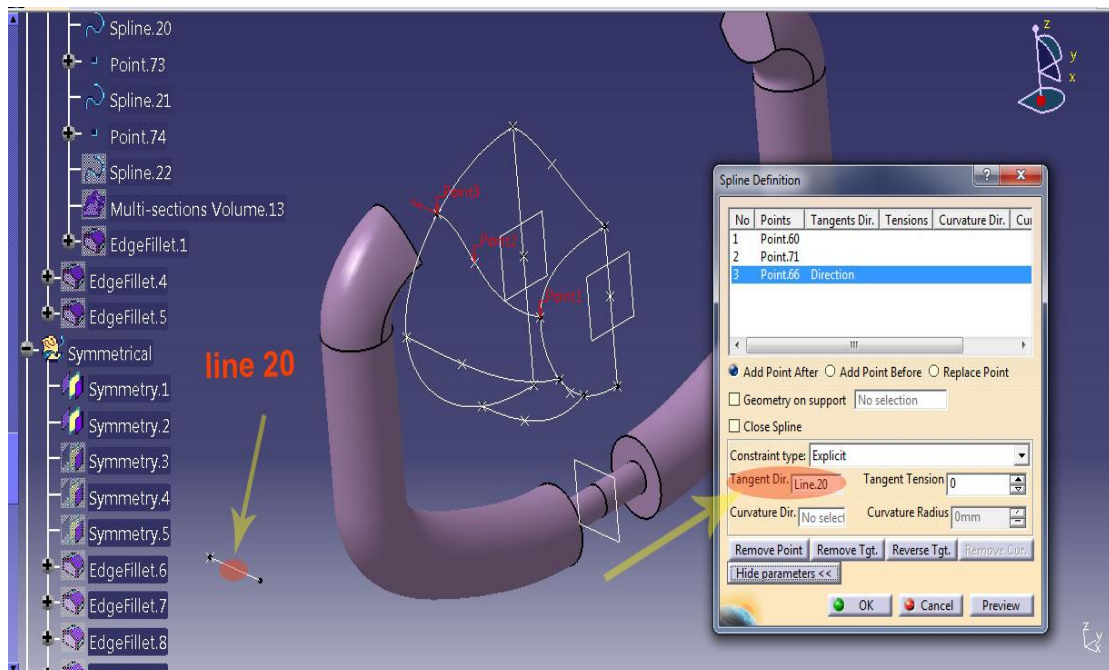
Driver side air bag module's 1st section wireframe with handle's volume.
